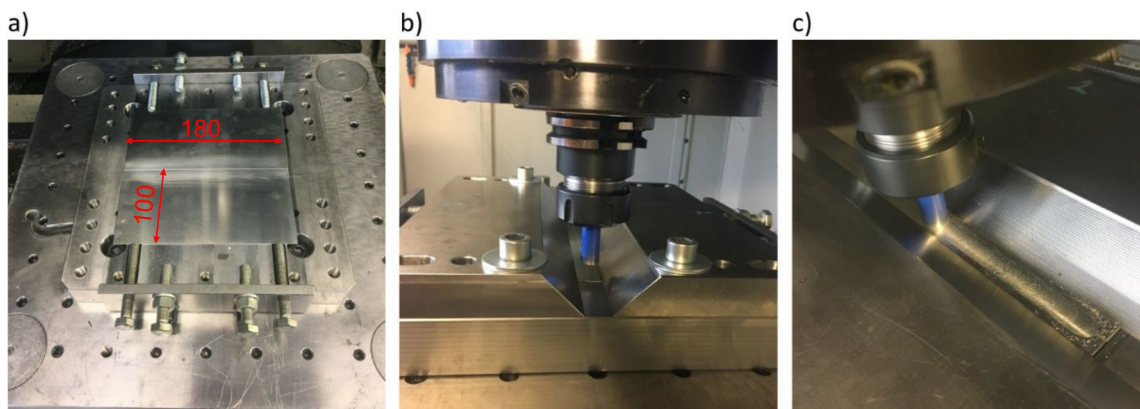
a) view of workpiece material installed on fixture device; b) view of stand for FSW process; c) the FSW process in action
